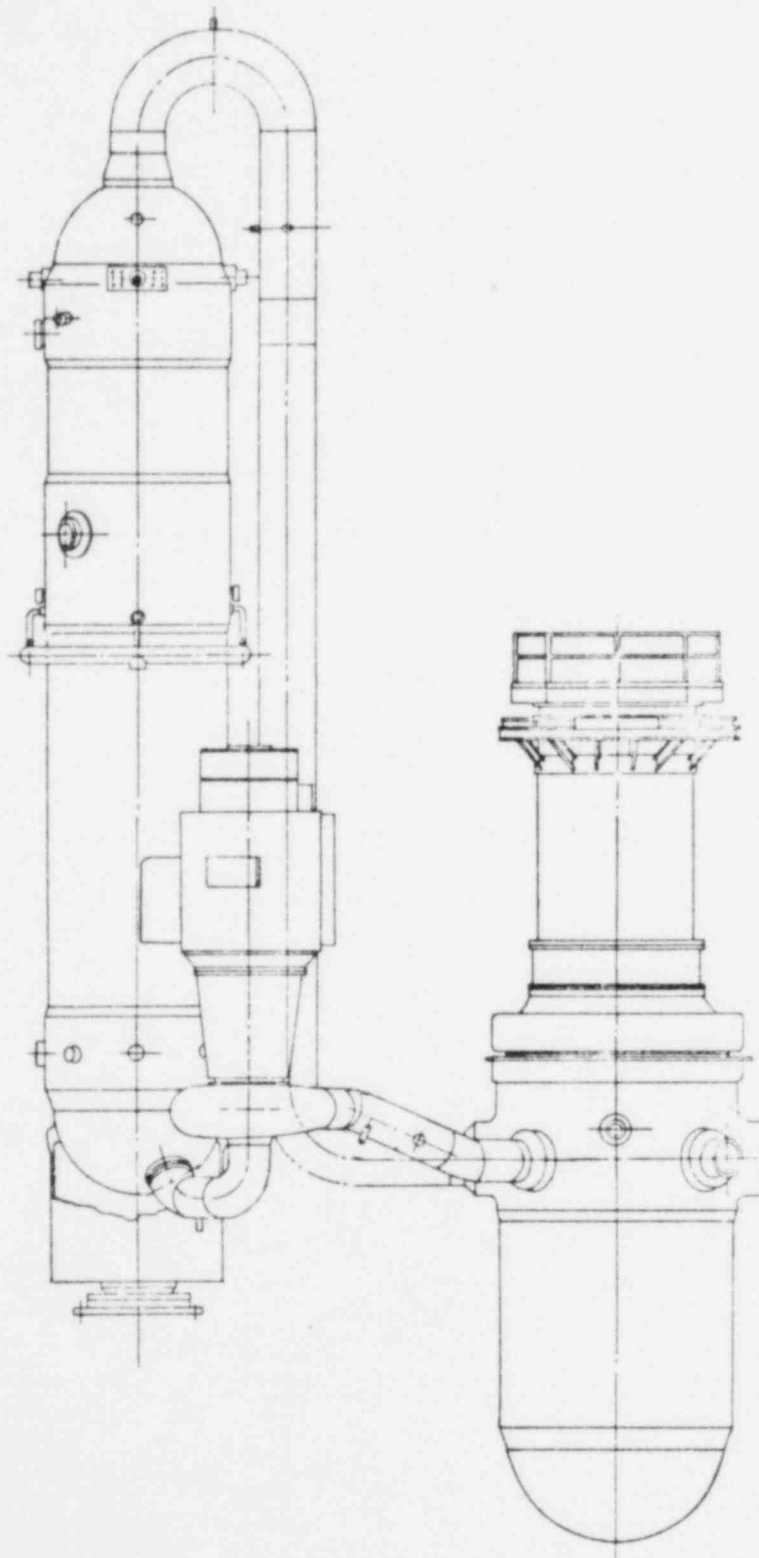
Nozzle-Supported Plant, Plan View
